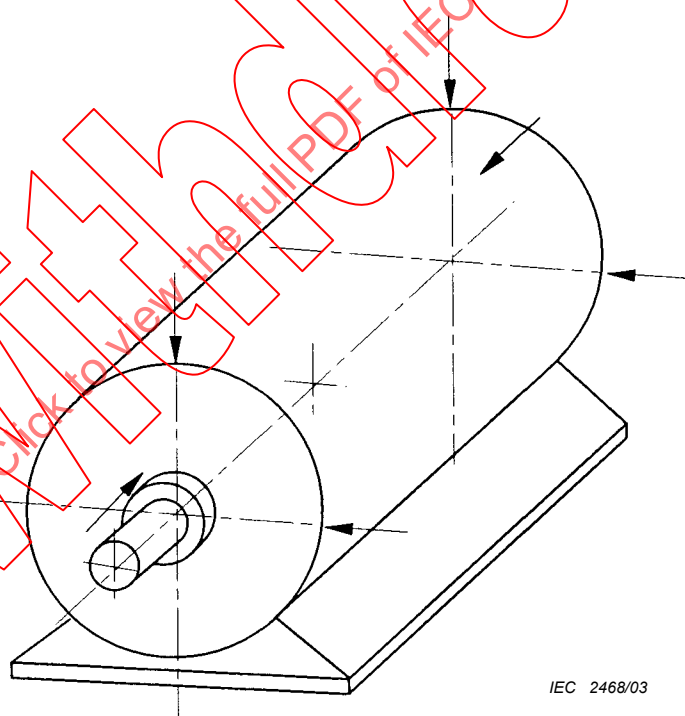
Measurement positions for those ends of machines where measurements according to figure 2 are not possible without disassembly of parts
